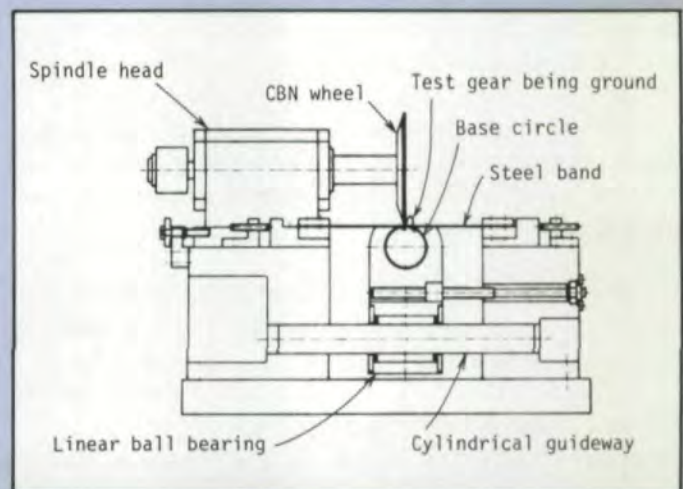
Schematic drawing of the grinder used for mirror finishing of tooth surface
